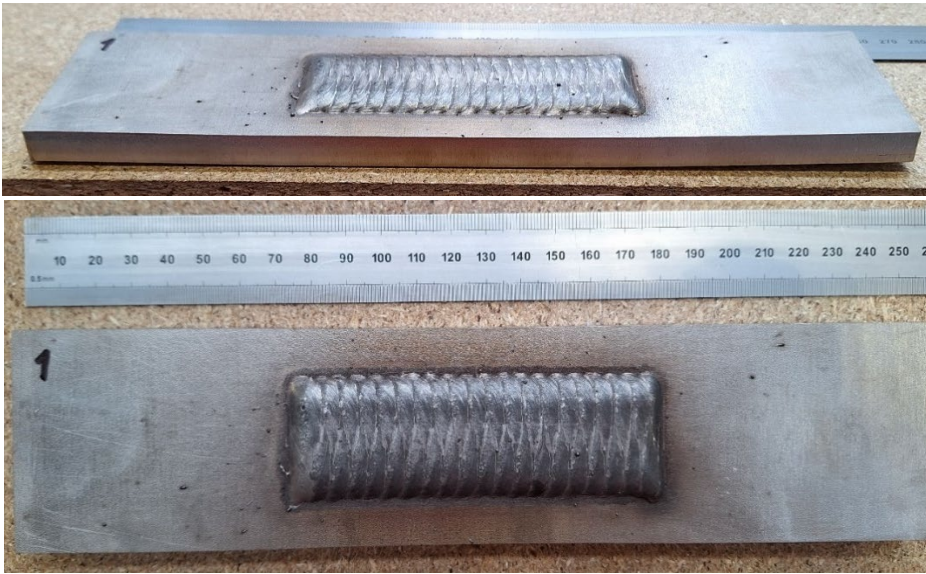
Side (a) and Top (b) views of sample 1 after unclamping
